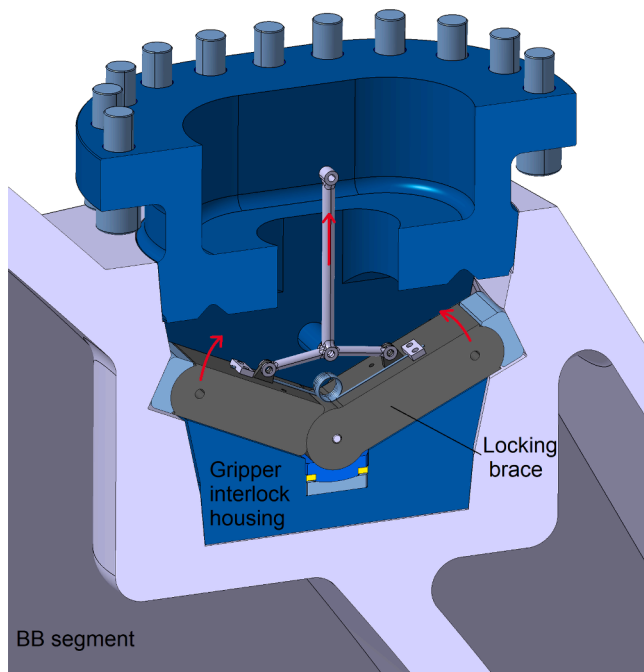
Gripper interlock engaged with BB segment with locking braces and indication of unlocking movement (actuator drivetrain not shown).
